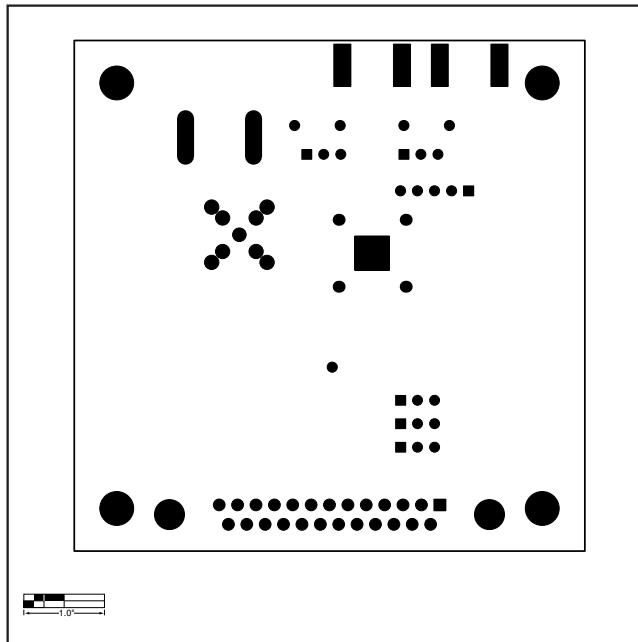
MAX355/MAX357 EV Kit PC Board Layout—Bottom Soldermask
